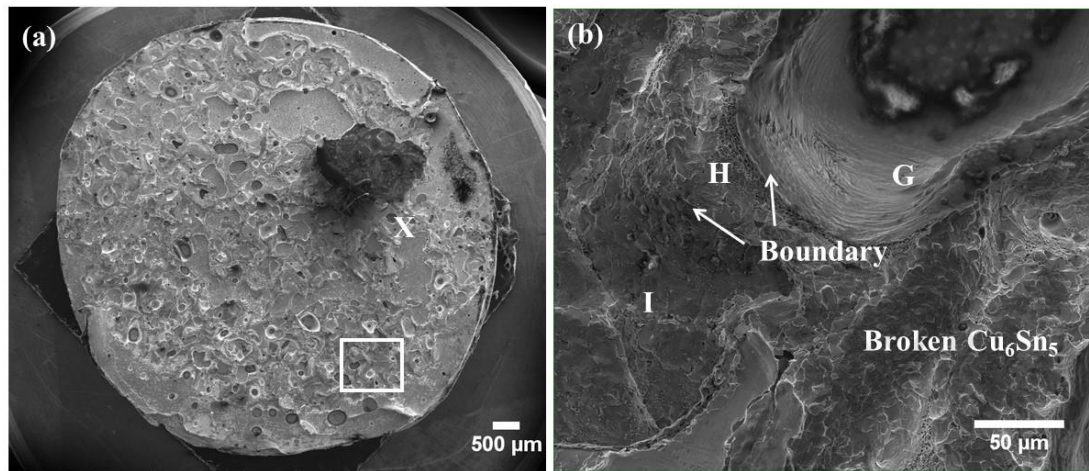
Fractured surface of solder joint with P25 porous Cu interlayer at 307°C and 300 s: (a) overall, (b) magnified view of the rectangle marked in (a)
